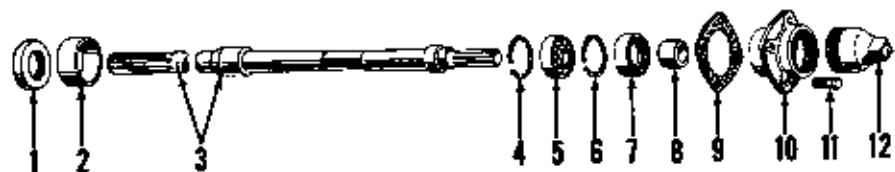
Components of pto output shaft assembly. View also shows shaft front seal (1) and support bushing (2) which are a part of the differential center housing assembly.
